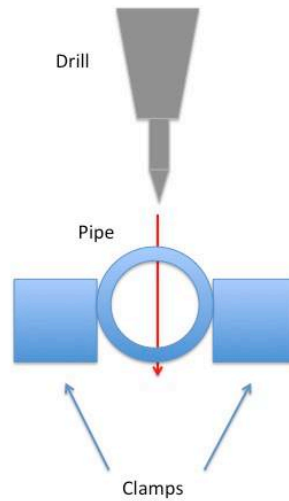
Schematic of the drilling process The manifold being milled is held in place by clamps, which do double duty in allowing the operator to locate the exact center of the pipe. Then the drill bit is lowered until the desired hole has been created.
